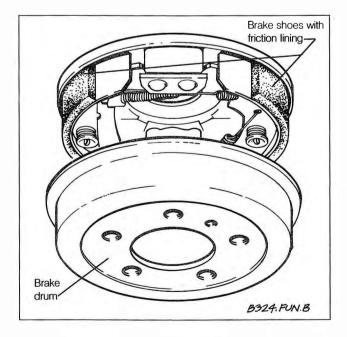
Drum brake assembly with brake drum removed to show brake shoes.
